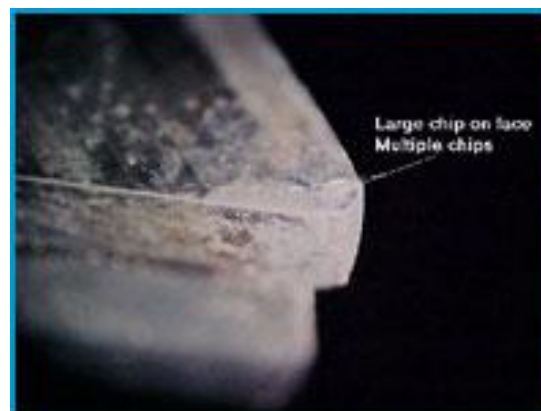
Photograph of Flaking [Courtesy: www.armg.com, 2011]
